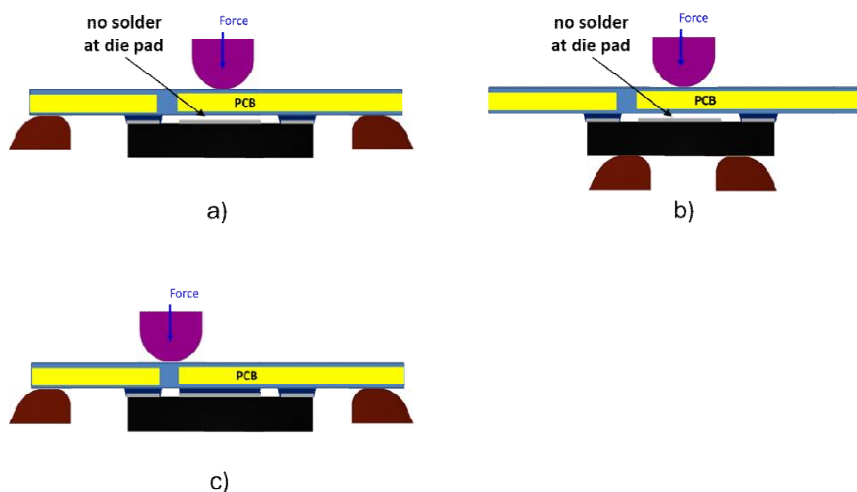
Testing scenarios (package soldered on PCB): a) centered with no solder at die pad, b) centered but support is on the package, c) offset with support on PCB
